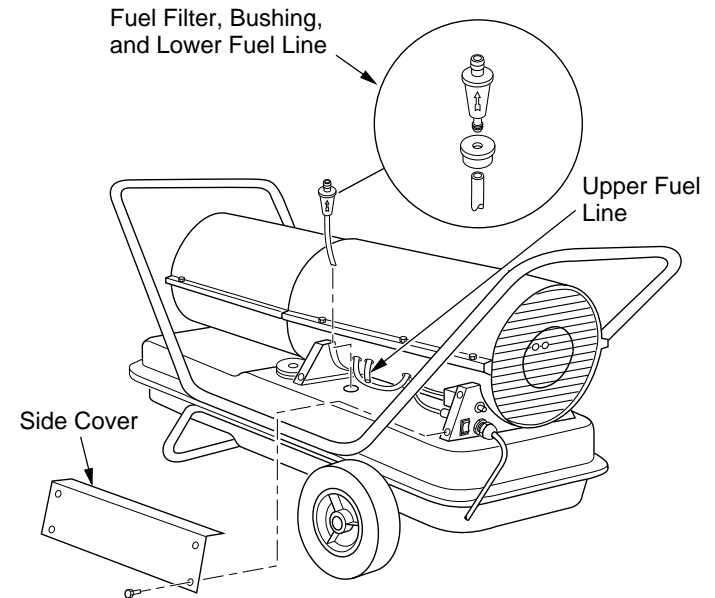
Fuel Filter Removal, 100/150,000 Btu/Hr Models
